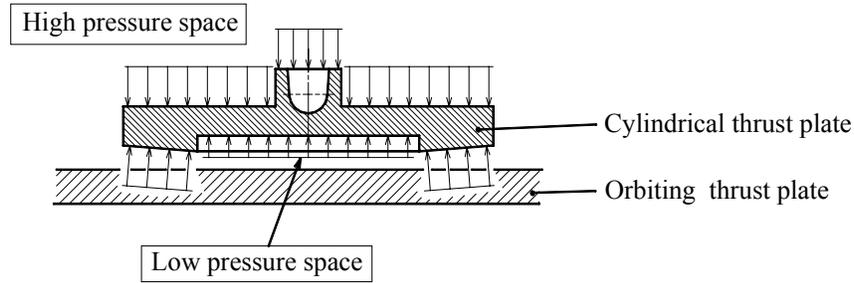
Gas thrust forces on fixed cylindrical thrust plate.
